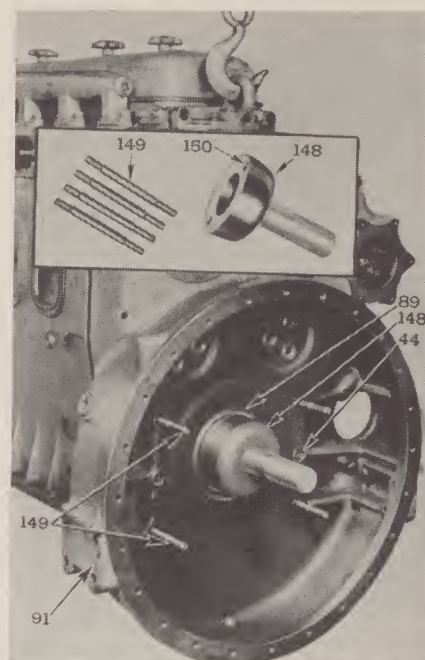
B—A GM engine showing method of removing or installing the flywheel housing (gear train cover) by using aligning studs (149).
